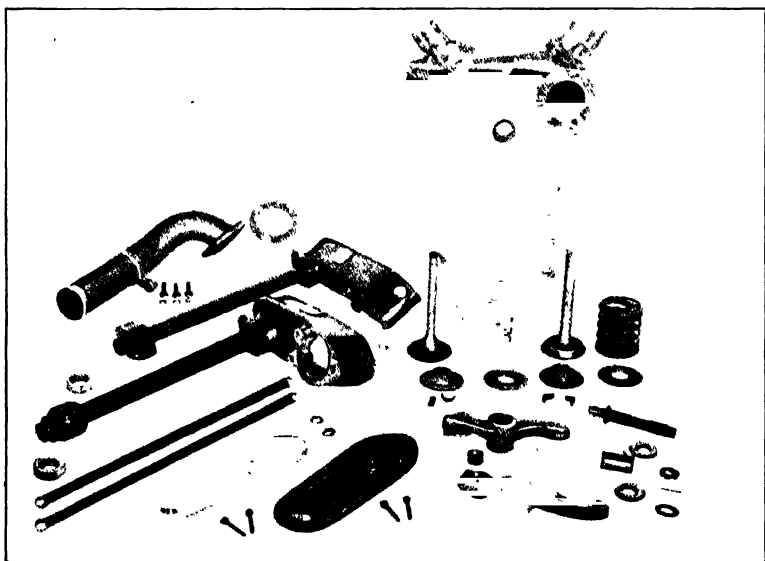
Wright Model J5 Cylinder and Valve Gear Disassembled.
